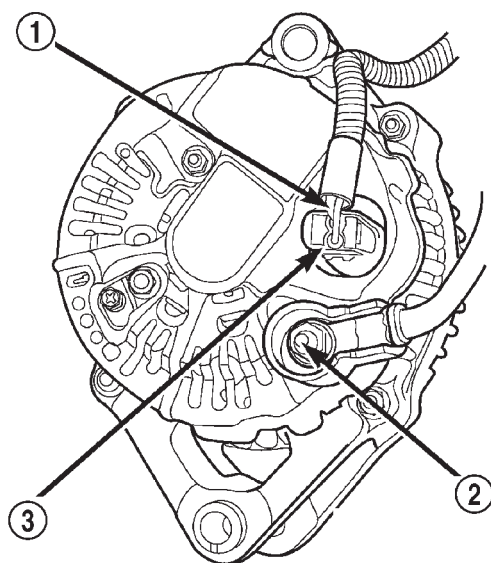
Remove/Install Generator—4.7L V-8 Engine
